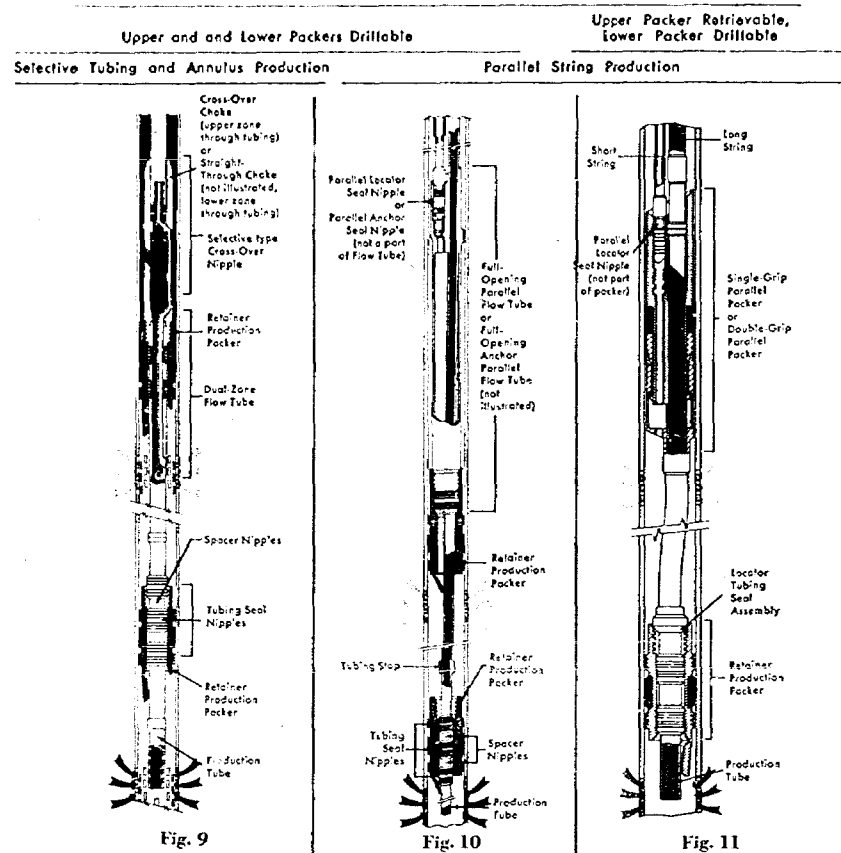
Production from each zone confined to its individual tubing string. Short string separately retrievable. Full-opening long string, retrievable packer and seals from lower packer run and retrieved together.
